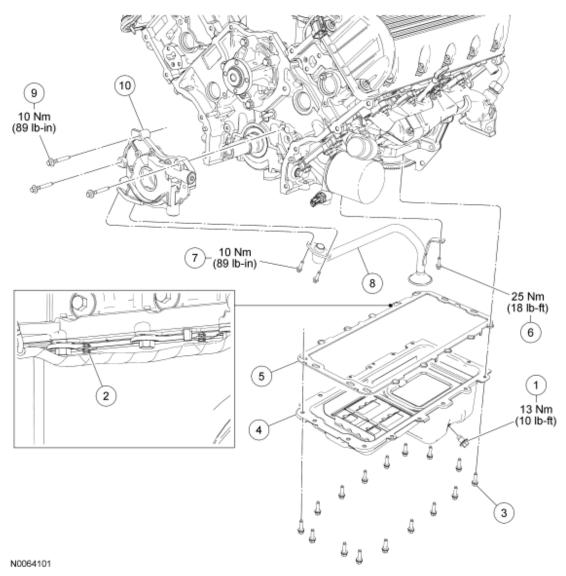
Exploded View Of Oil Pan, Oil Pump, Oil Pump Screen and Pickup Tube (With Torque Specifications)
